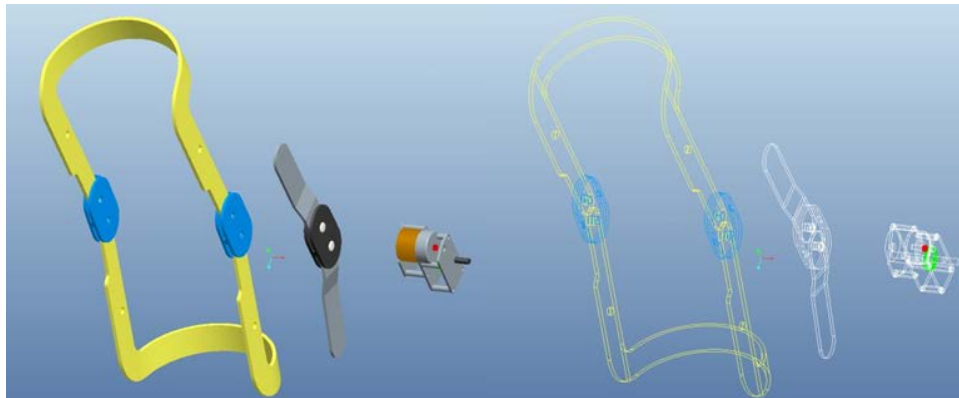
Pro/Engineer Back Exploded 3D Solid Model & Wireframe Views
